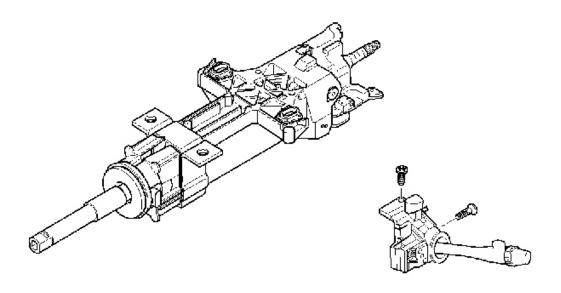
Removing/Installing Turn Signal Switch Assembly Courtesy of GENERAL MOTORS CORP.
